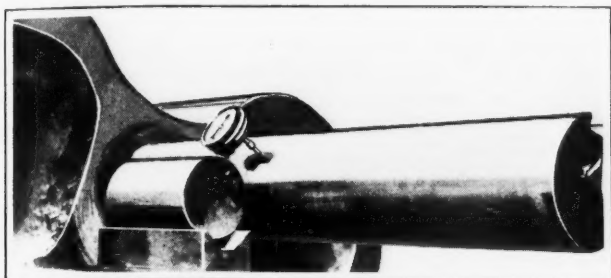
Fulcrum Shown in Fig. 1 being Used for Straightening Pump Shaft
